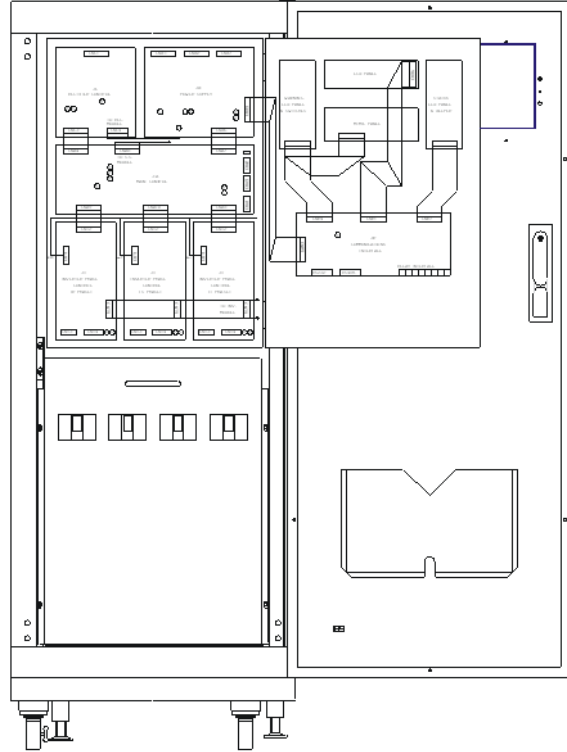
Front View of System with Door Open and PCB Module Door Open
